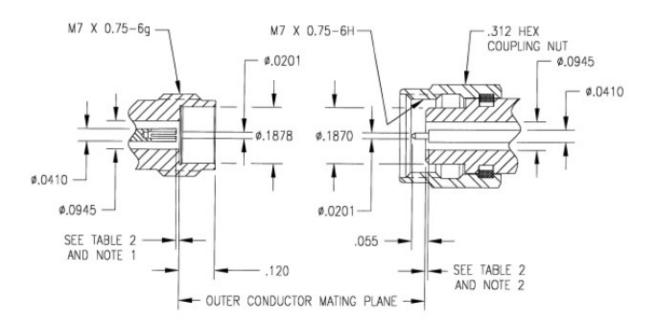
Critical Center Contact Location Dimensions for 2.4 Connectors
